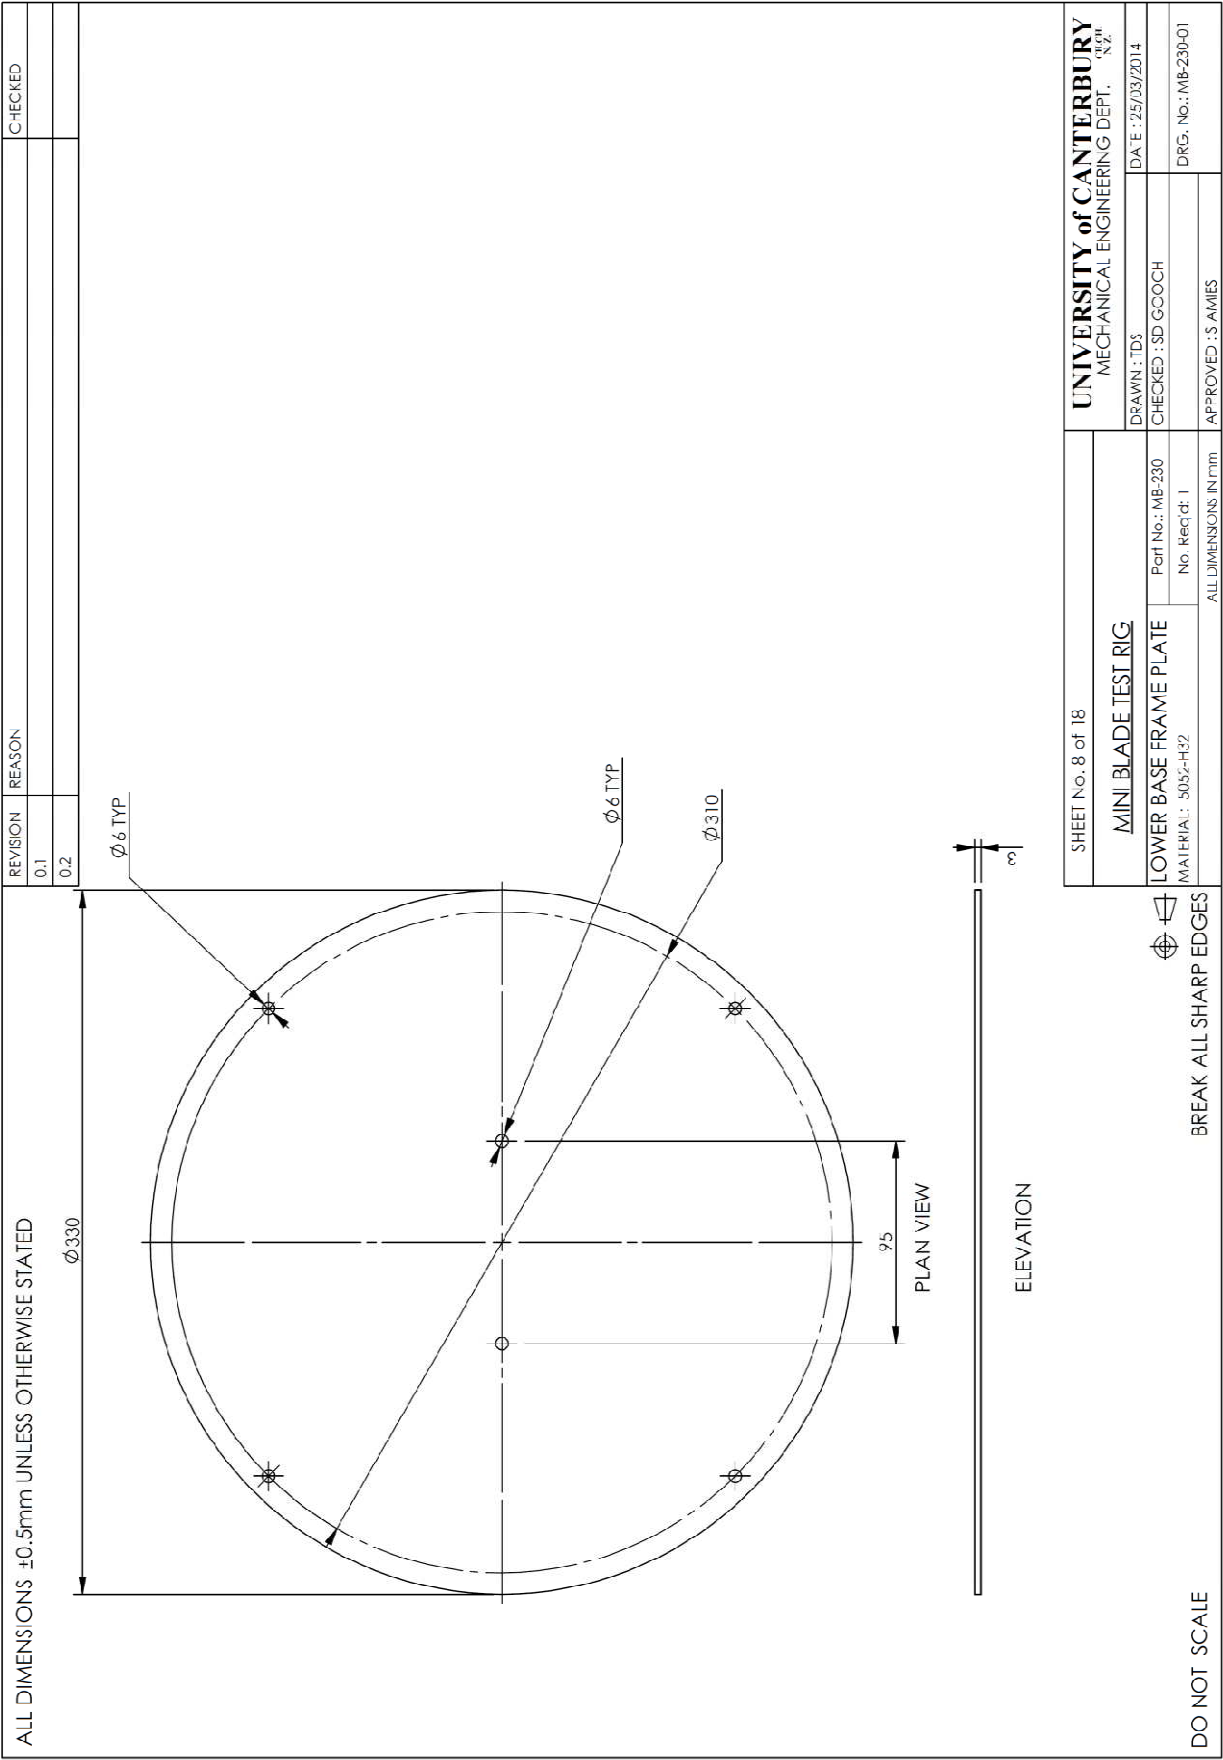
Manufacturing drawing for the lower base frame place in the variable stroke test rig.
